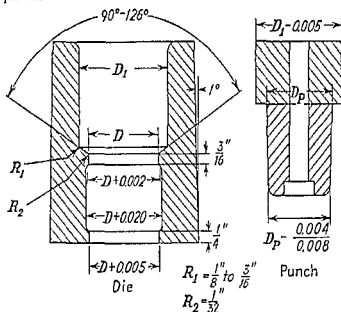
Extrusion-die insert and punch elements for a forward-extrusion die.⁸
